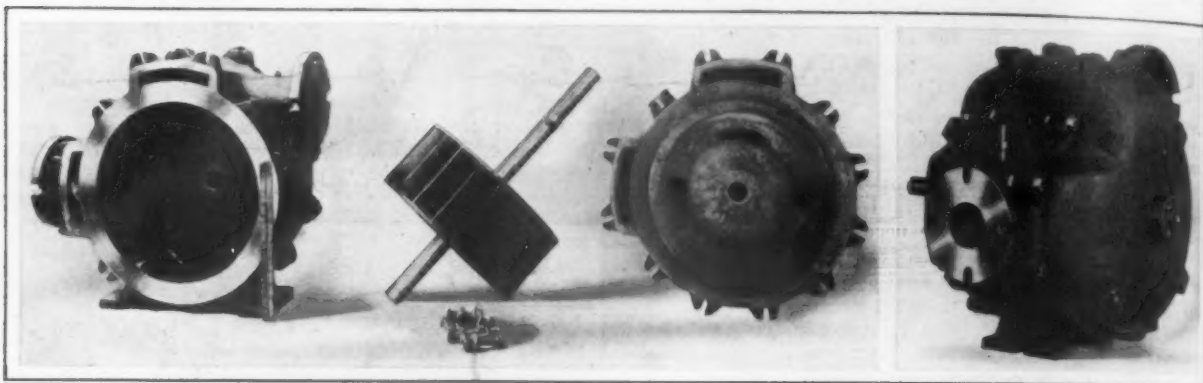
The Three Parts of the Nash Air Compressor and Vacuum Pump
